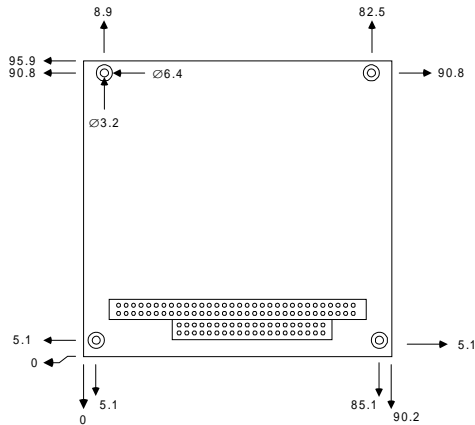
PC/104 module dimensions (mm) (± 0.1)
